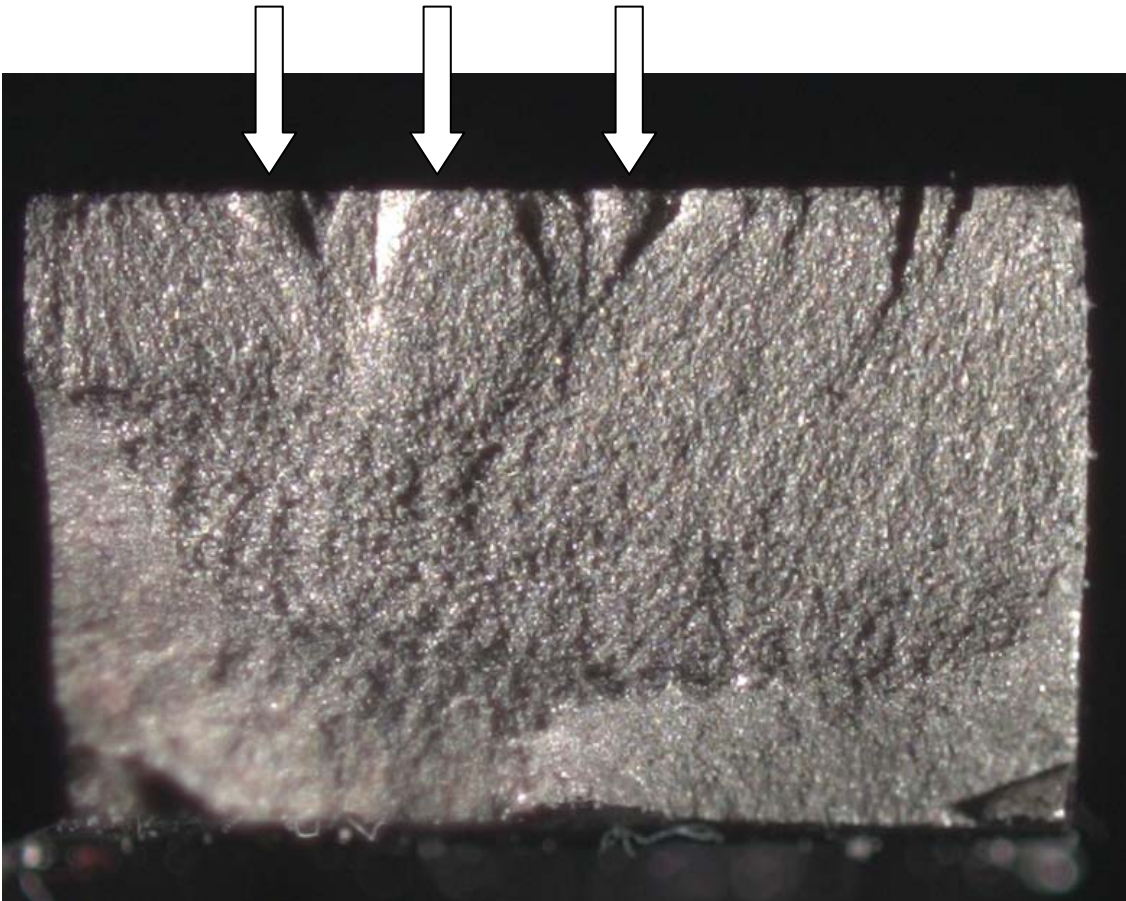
Fracture surface of failed specimen of test # 2
